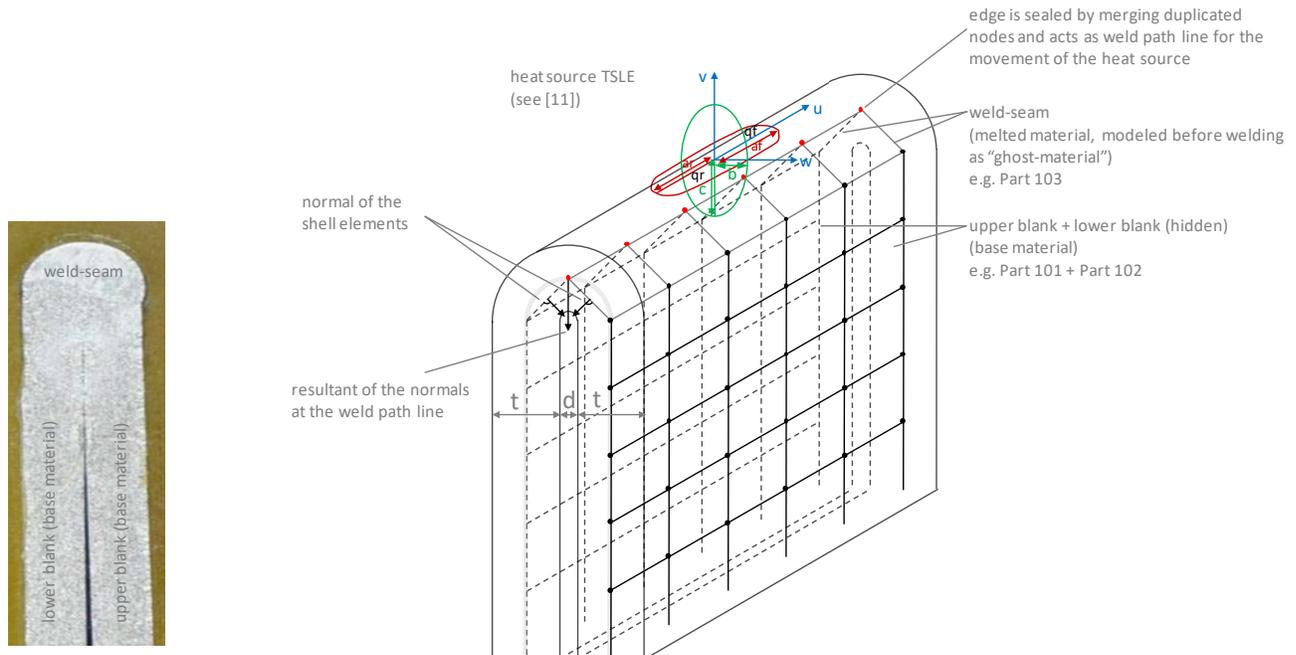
Modeling scheme of a double-layered “Die-Less-Hydroforming” blank ([2], originally from [8], edited) including heat source for welding & corresponding exemplified macro-section of the edge weld, additional fixation equipment is not illustrated
